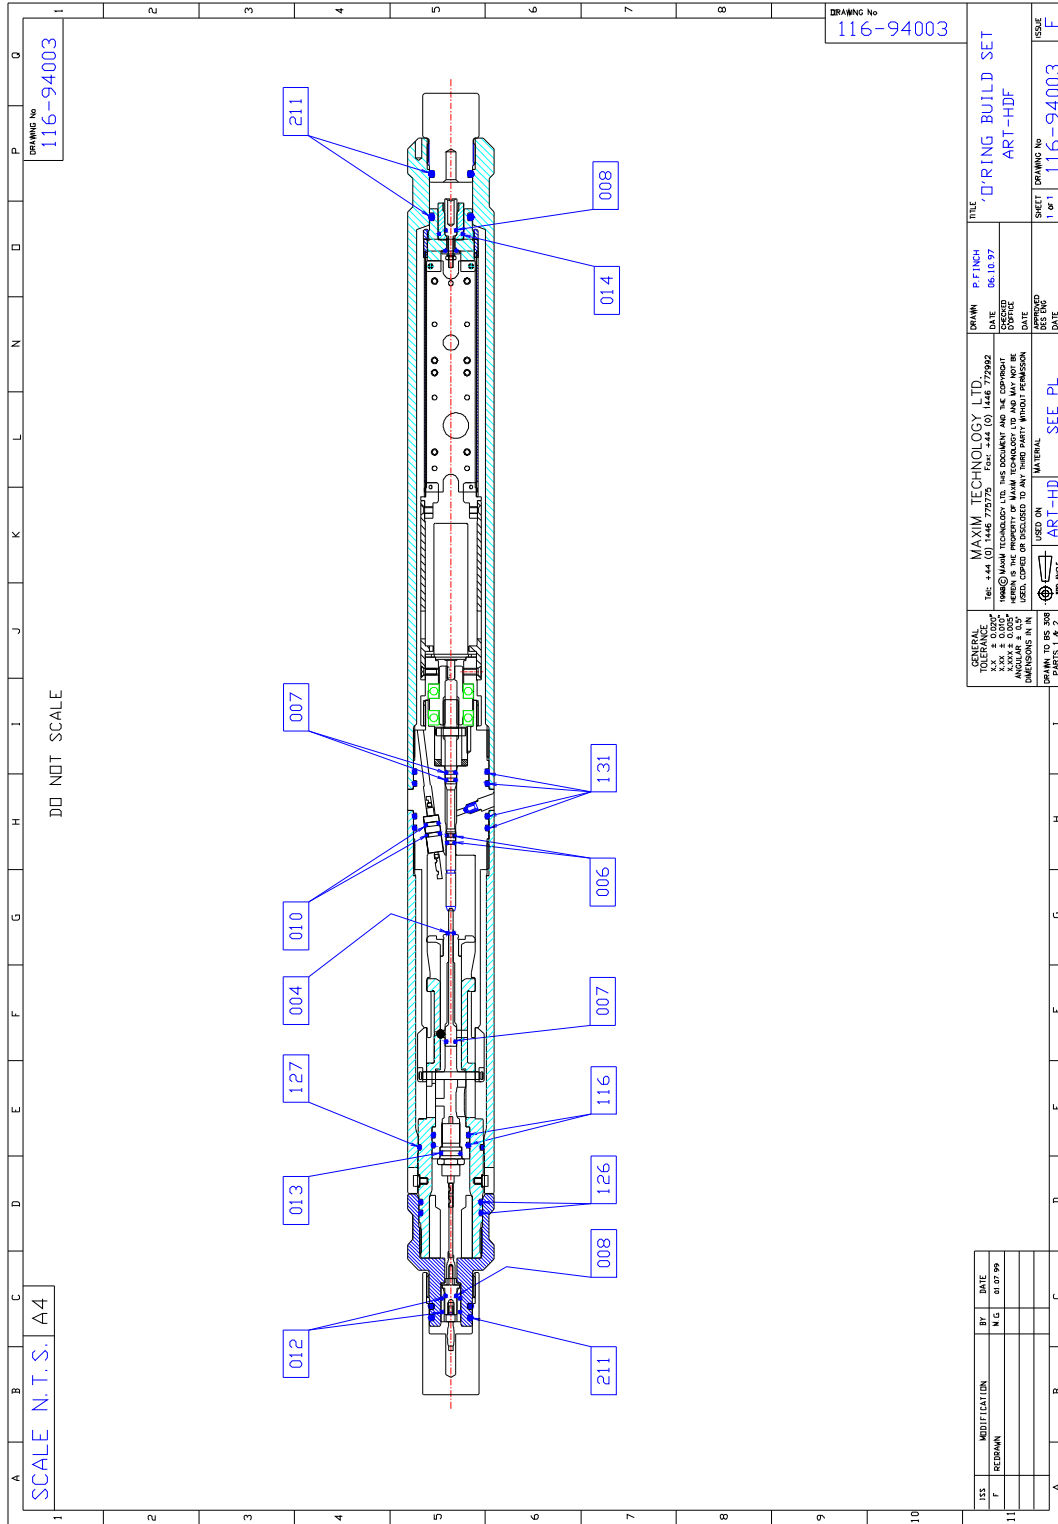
O'ring Location Drawing - 116-94003-F
